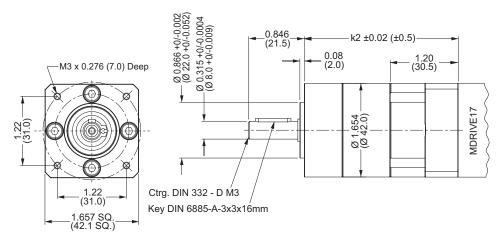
Planetary Gearbox Specifications for MDrive17Plus
